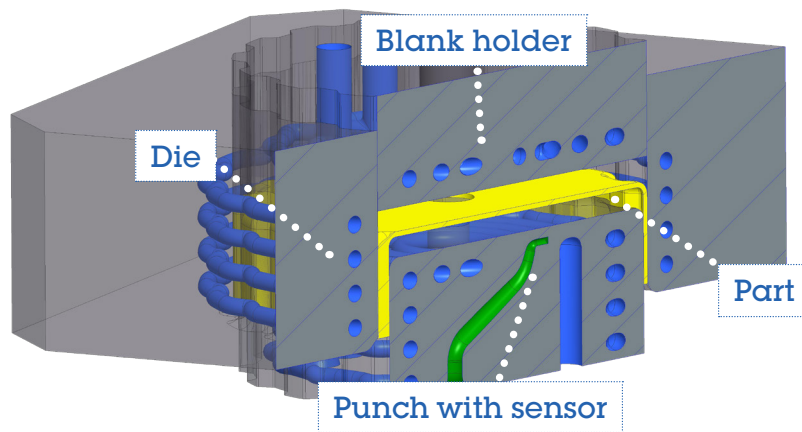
Hot sheet metal forming tool with integrated conformal cooling channels and a thermocouple
